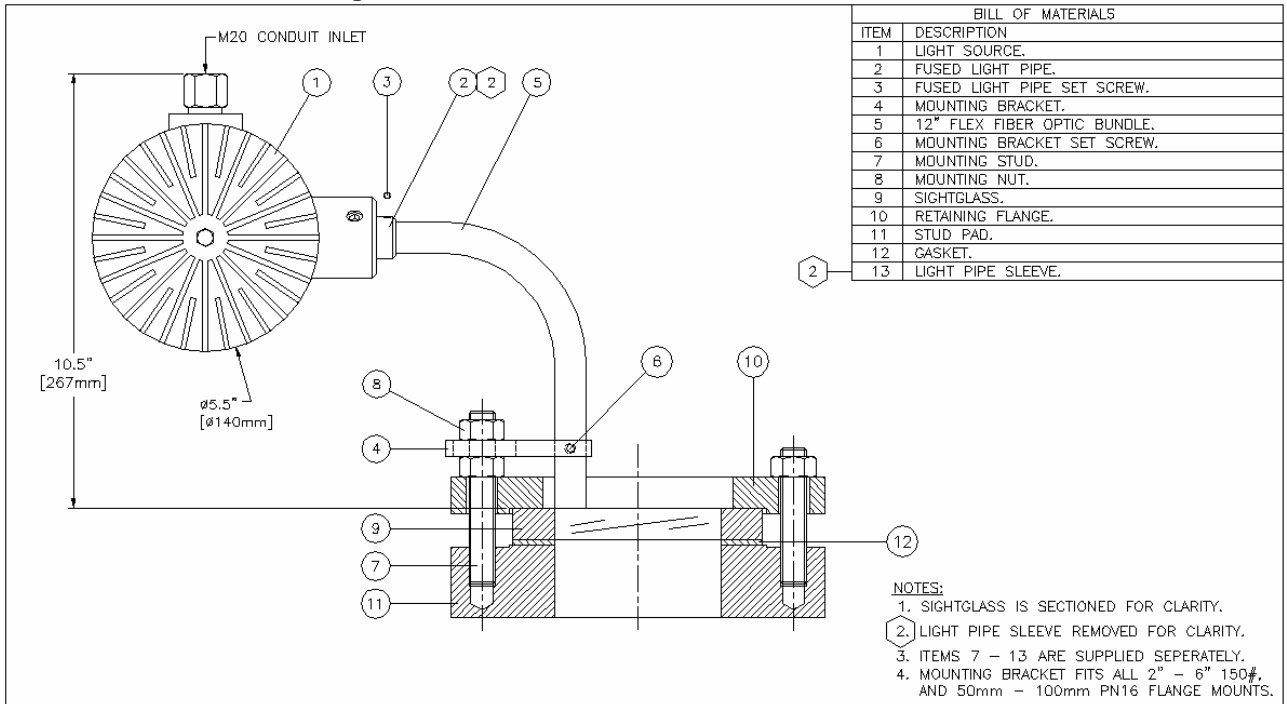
12" Solid Bundle Mounting Illustration - Sightglass Mounting
